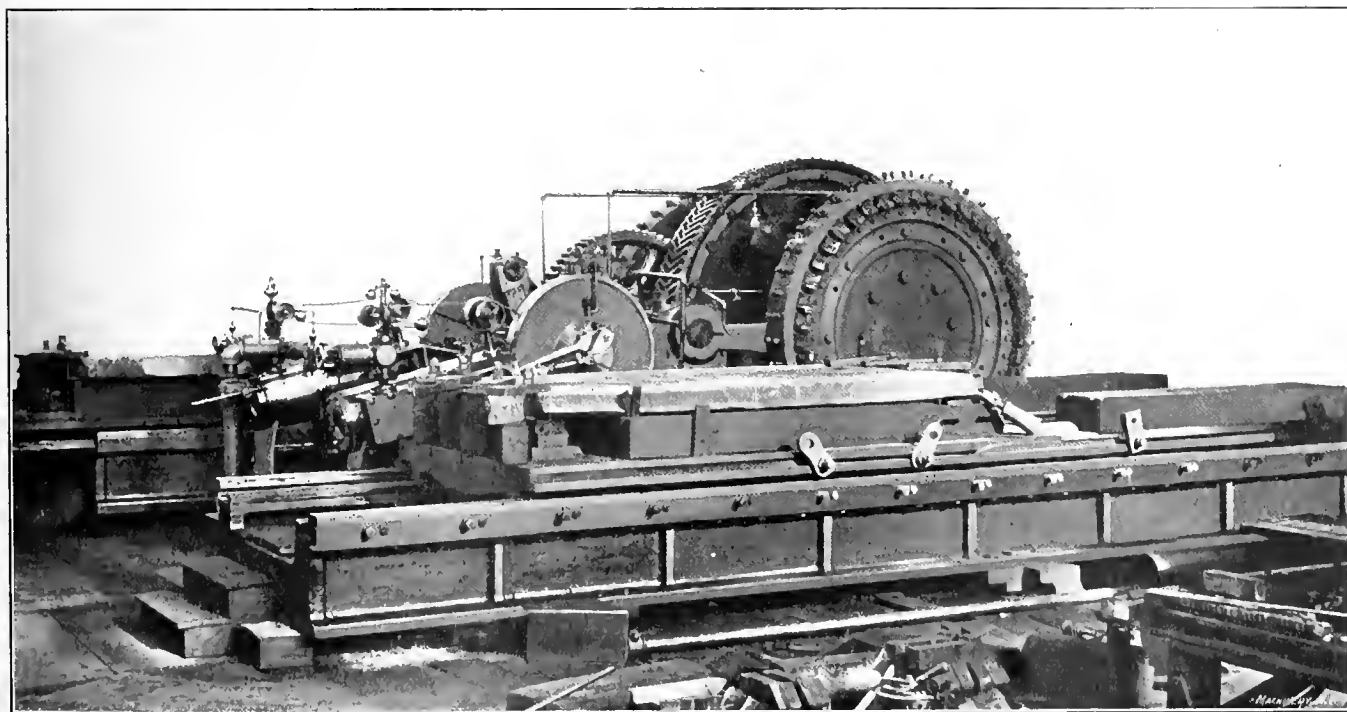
Double, Steam-driven Rotary Planer, for Finishing the Edges of Armor-plate Sections.
